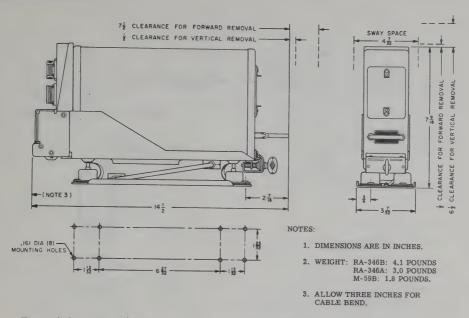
RA-346 () Receiver Accessory with M-59B Mounting Installation Dimensions
